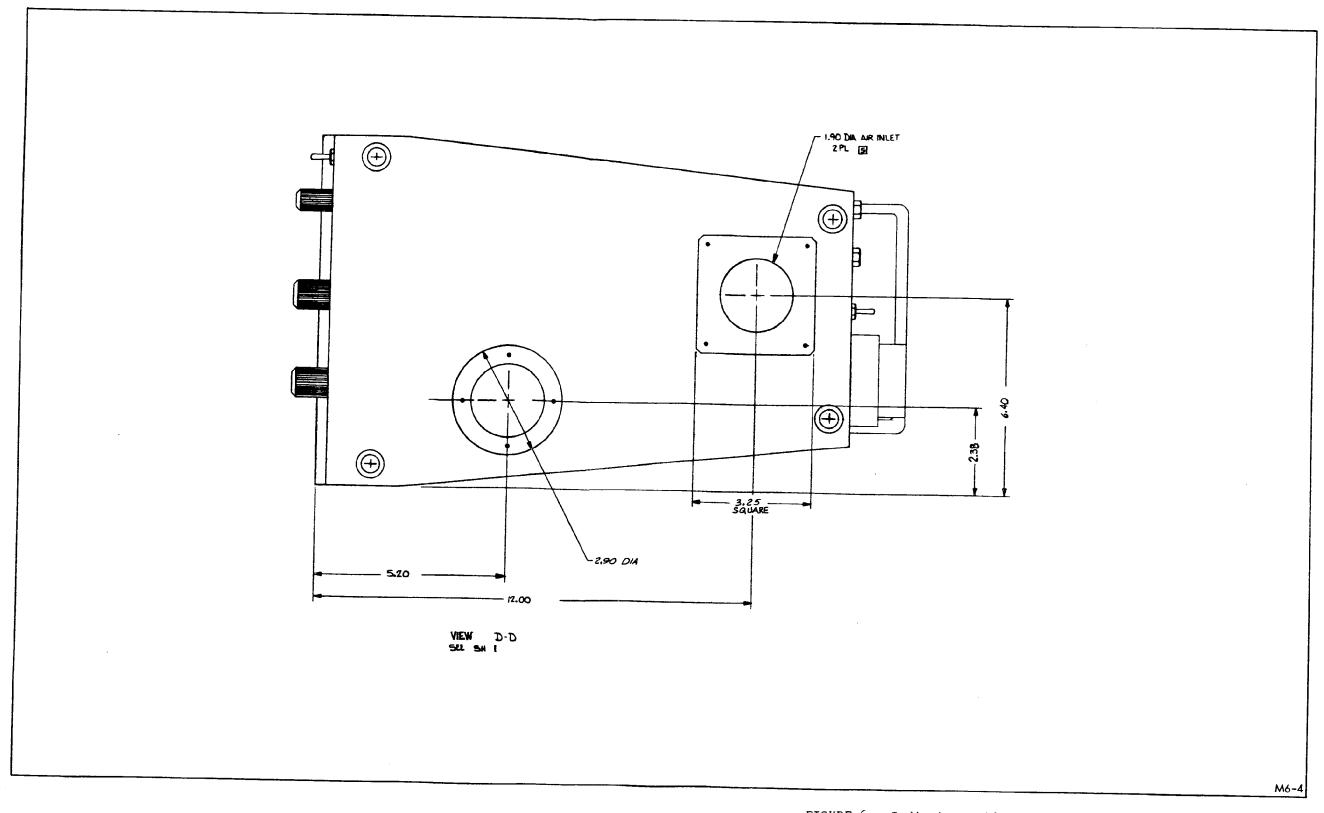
Indicator, video, outline drawing. (sheet 4 of 4)
